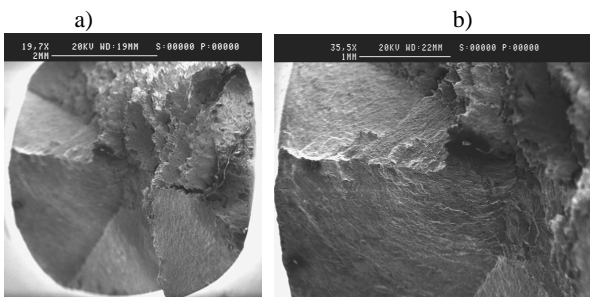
Torsional fatigue fracture surface of D38MSV5S ($\tau_{max}=260$ Mpa, $R=-1$, $N_f=3.8 \times 10^6$); a) overview and b) fatigue shear step
